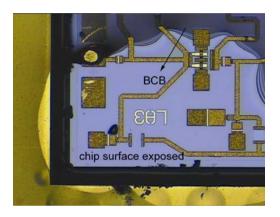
Chip surface exposed after BCB coating due to the slanting or excessive high placement of the chip
